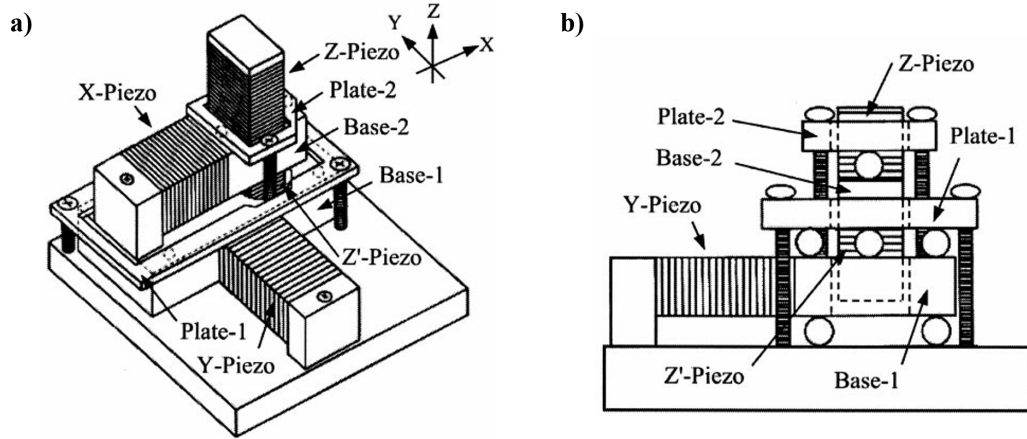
Scanner assembly [23]. (a) Cutaway view and (b) rear view.
